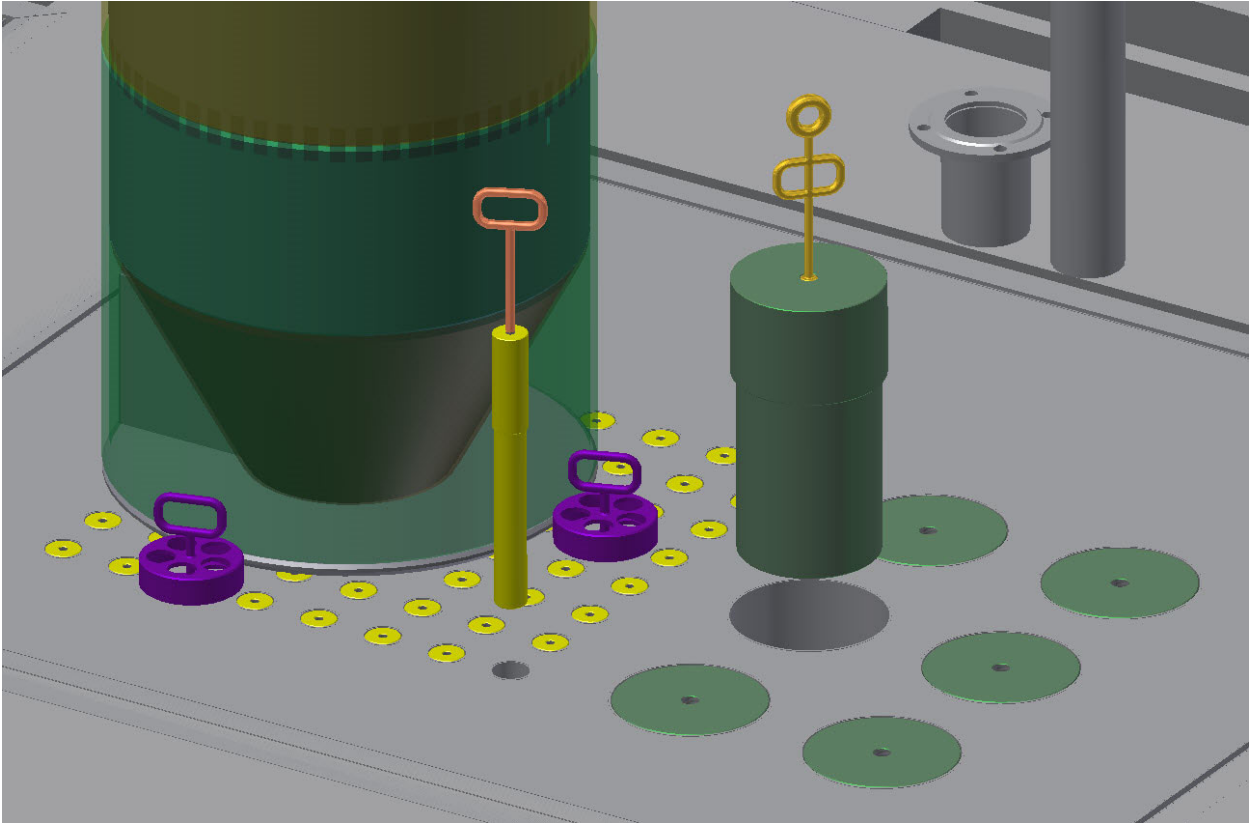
The fuel storage pool cover, showing the plugs, the plug lifting devices, the fuel transfer cask, and the cask locators.
